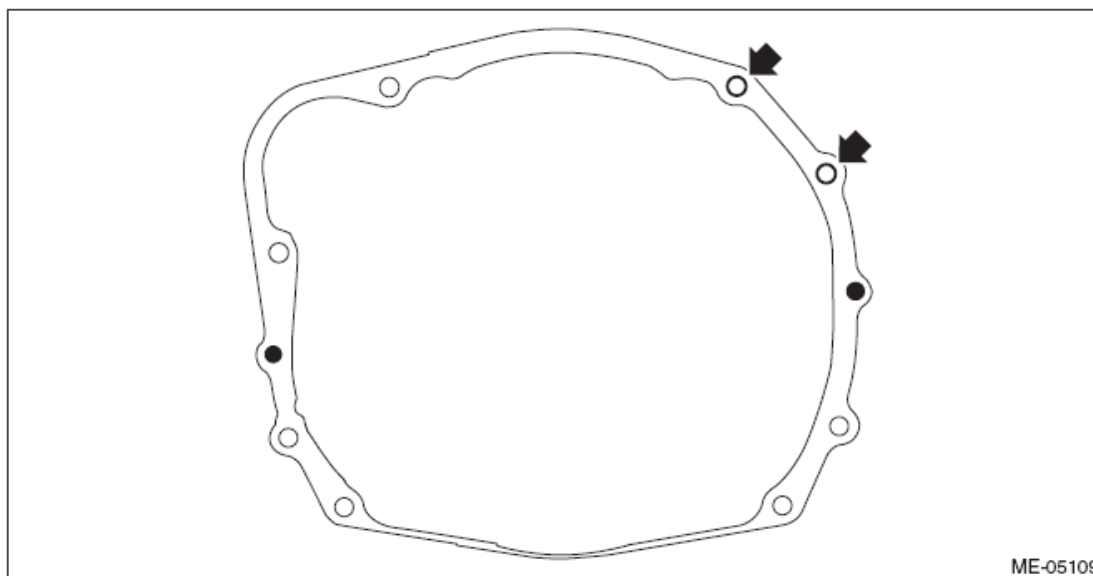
Locating Transmission To Engine Upper Side Bolts (MT Model)
